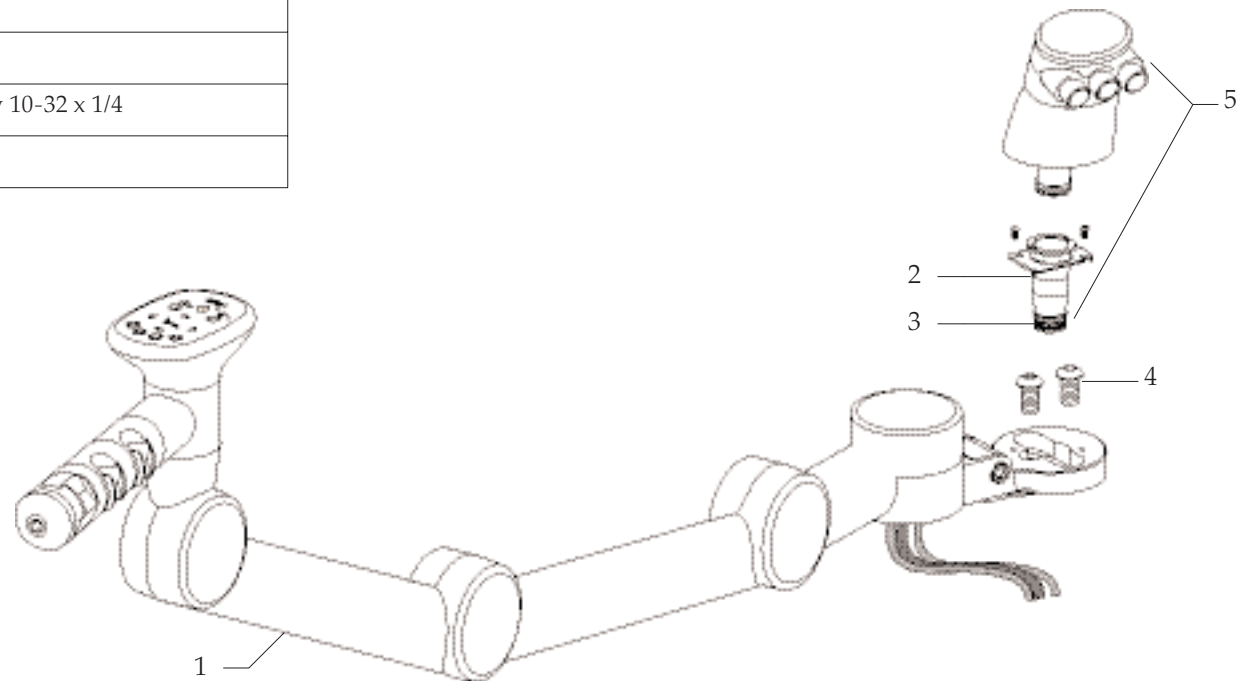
Assistant's long arm assembly with a single 3 position holder assembly.
